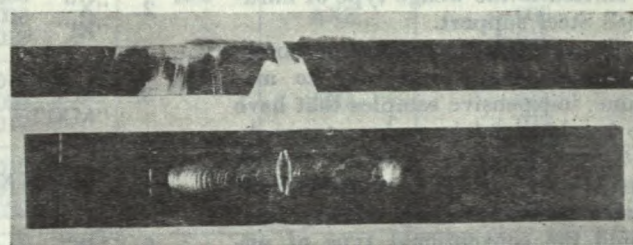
Tension-bending double-notched (V-V) sample with notched longitudinal bead weld, as shown in Figure 8-C.
